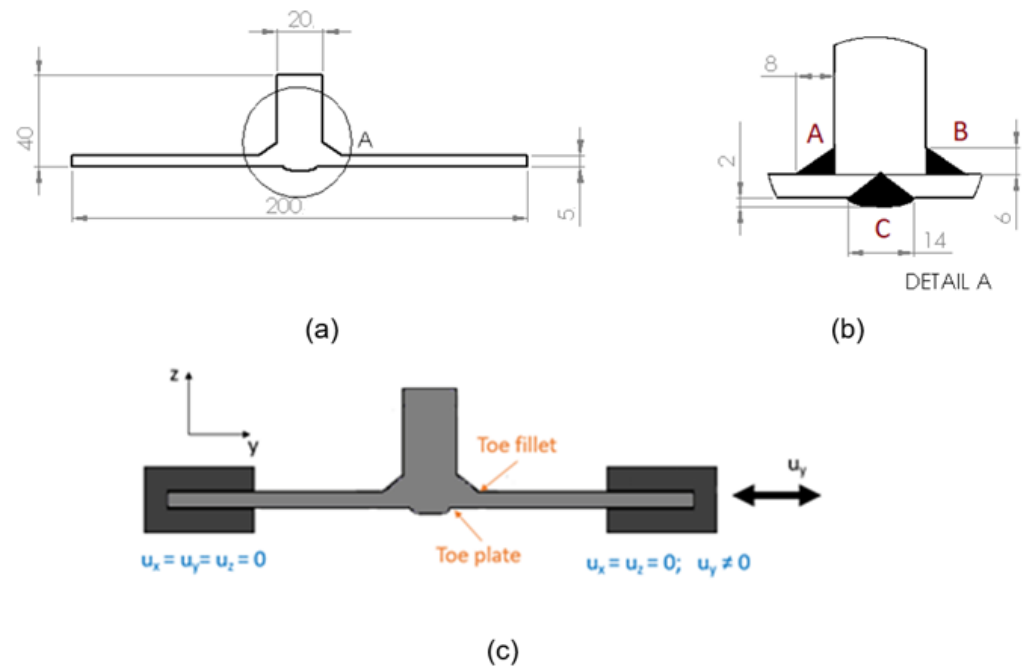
Geometry (a), weld details (b), boundary and loading conditions (c) of welded specimens.
